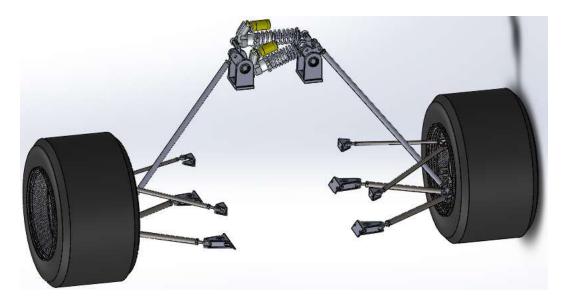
Front suspension assembly with control arms, pushrods and wheels
